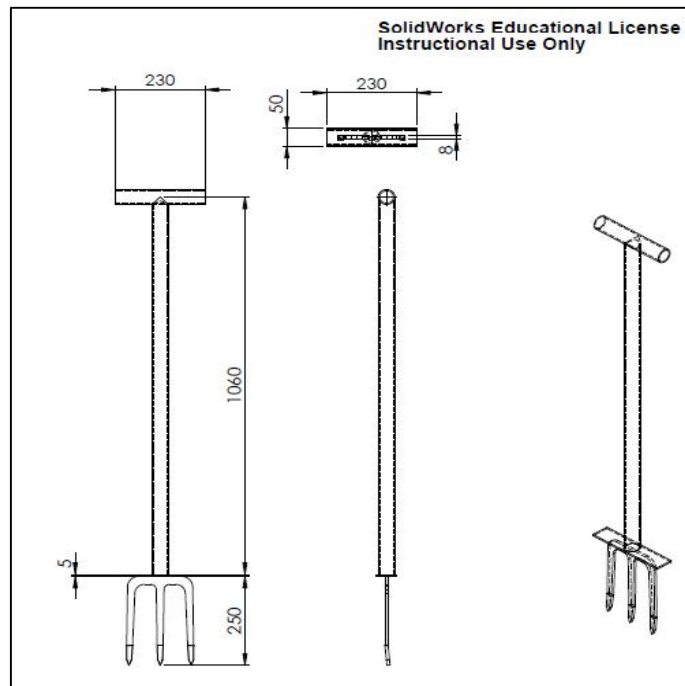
Conceptual design of hand tool harvester (measurement unit millimeters)
